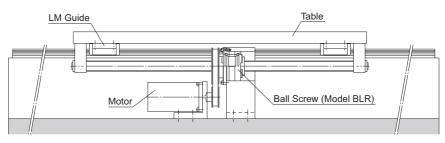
Example of Installation on the Table (Ball Screw Nut Fixed)
